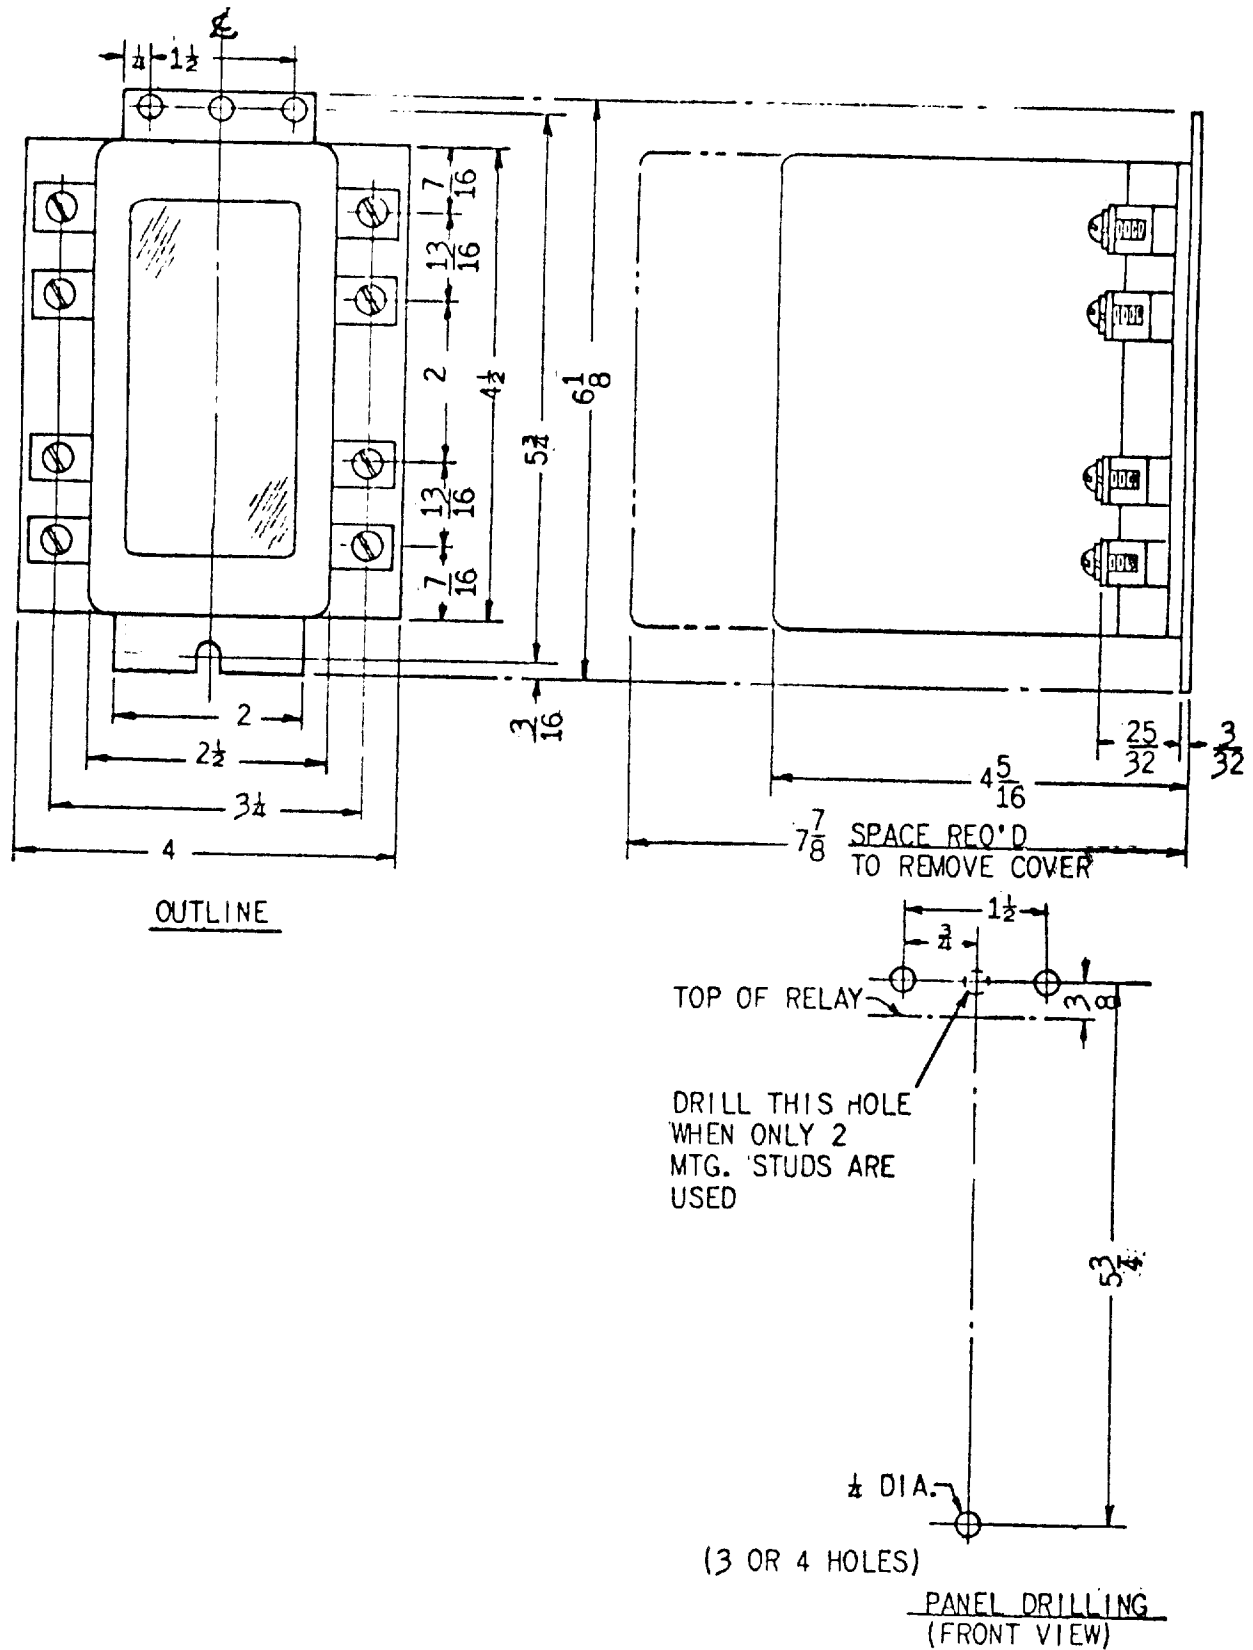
(0208A3773) Outline And Panel Drilling Dimensions For The Front Connected, Surface Mounted HAA16C Relay
